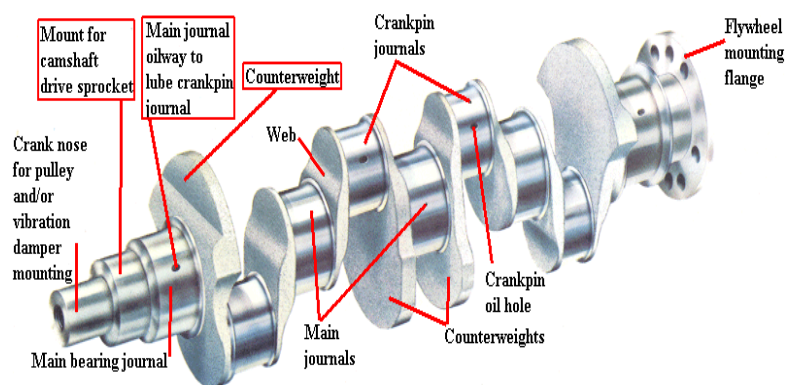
Typical Crankshaft with main journals that support the crankshaft in the engine block.
